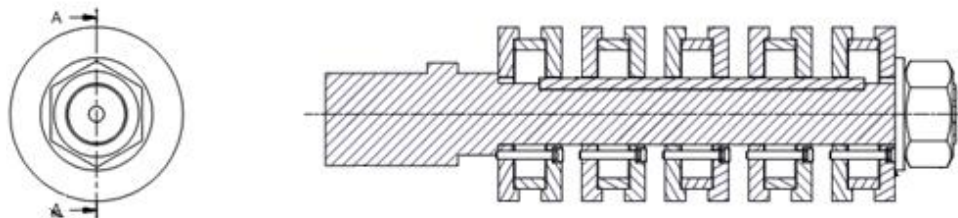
Technical drawing of the mould mandrel used for NOL-ring specimens winding.
